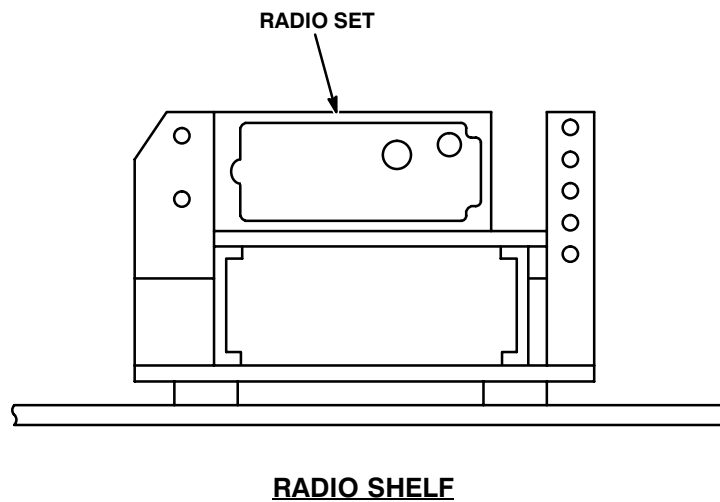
(2). MK and Radio Installation: Radio Equipment Locations
